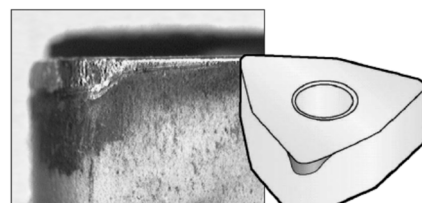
Optimal wear of the cutting tool—uniform flank wear.
